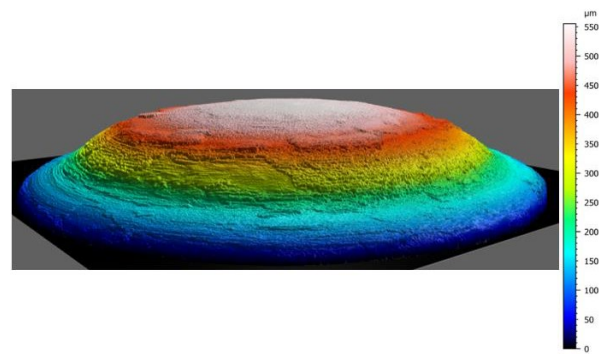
Microtopography of the tip of the welding tool used at 0.75 m/min and 750 rpm, after 20 000 mm of weld
